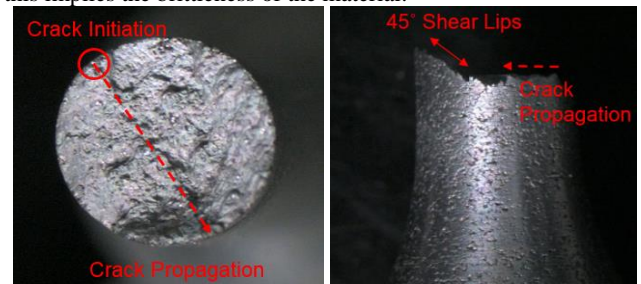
Tensile crack surfaces of as-built of AlSi10Mg (a) Crack propagation (b) Shear lip.
